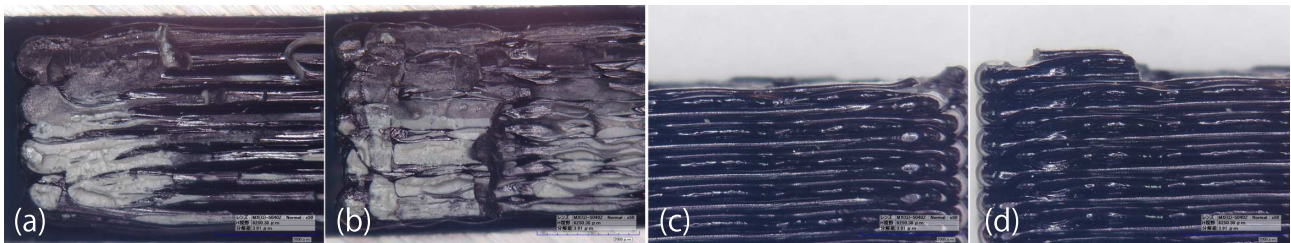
Fracture surfaces and side views of specimens after three-point bending tests. (a) S-pattern, top view; (b) Z-pattern, top view; (c) S-pattern, side view; (d) Z-pattern, side view. Whitening is strongly observed predominantly on the tensile sides of both the S-pattern (a) and Z-pattern (b) specimens. The Z-pattern specimen (d) exhibits a step at the fracture surface corresponding to interlayer transition. Instrument metadata overlay is retained as recorded by the digital microscope (Hirox KH-7700, $\times 50$).
